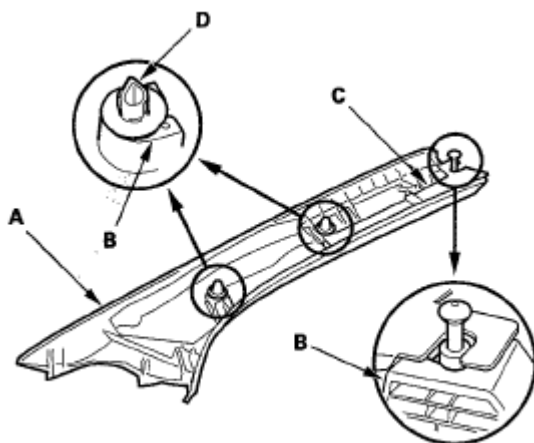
Identifying Guide Bracket, Clips And Pin Seating Surfaces
